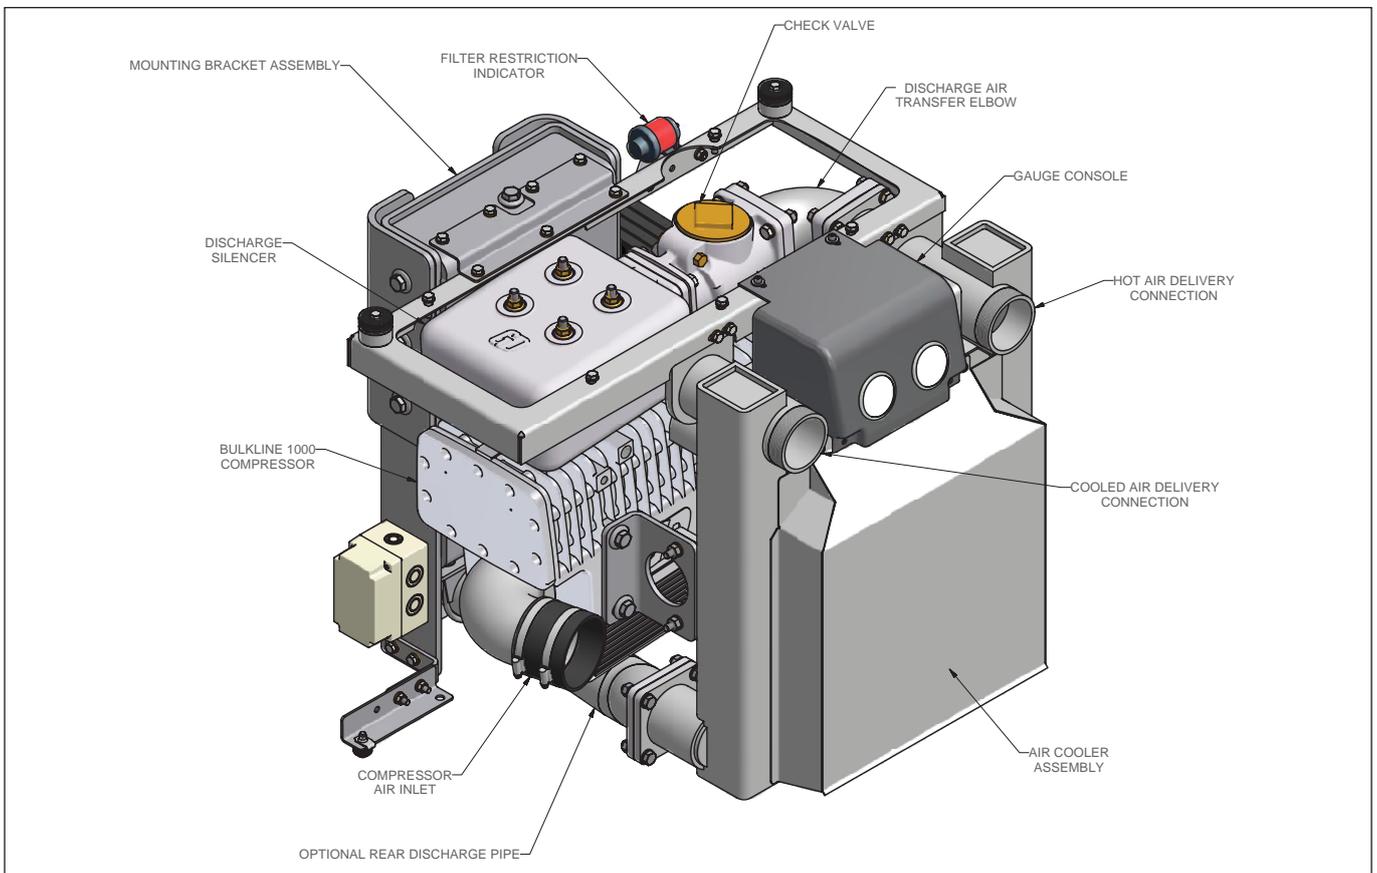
Components Front Isometric View with Enclosure Removed Clockwise (Right Hand) Rotation
